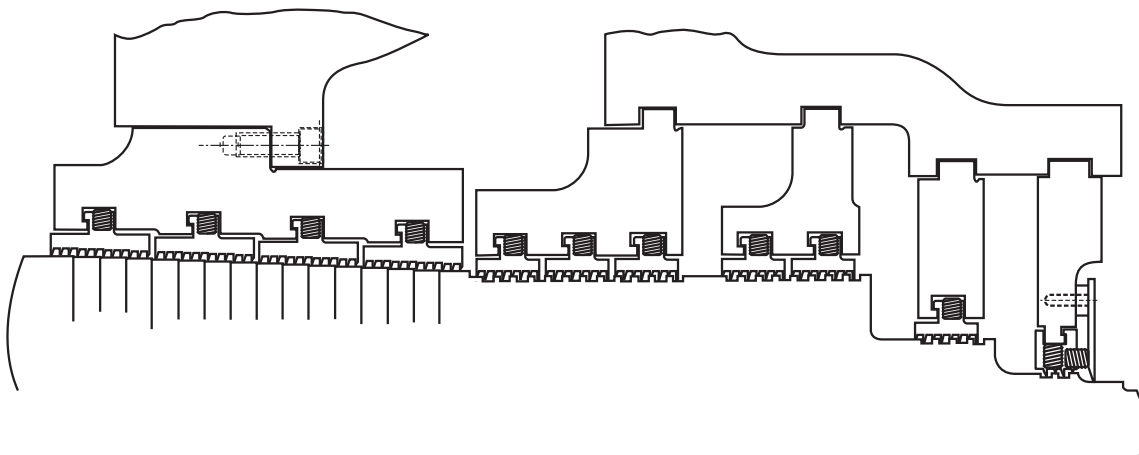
Typical Turbine Shaft Seal Arrangement—HP End
